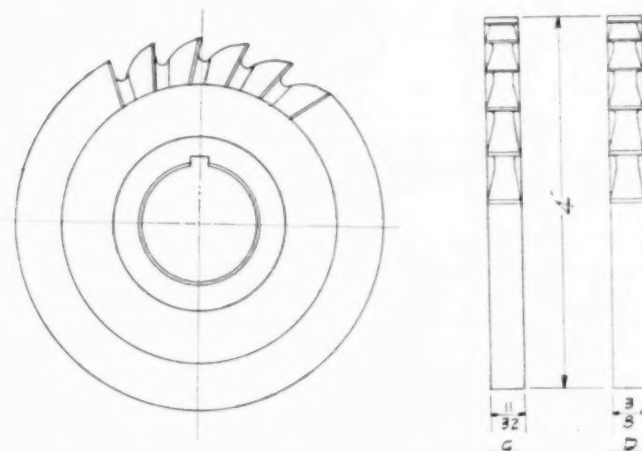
STANDARD AND SPECIAL-SIZE MILLING CUTTERS
